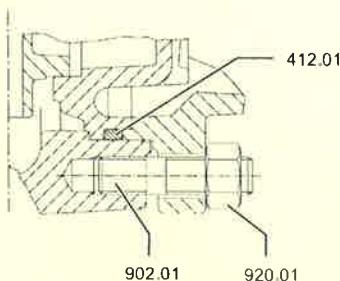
Sizes with shaft diameter 24 at the shaft seal
